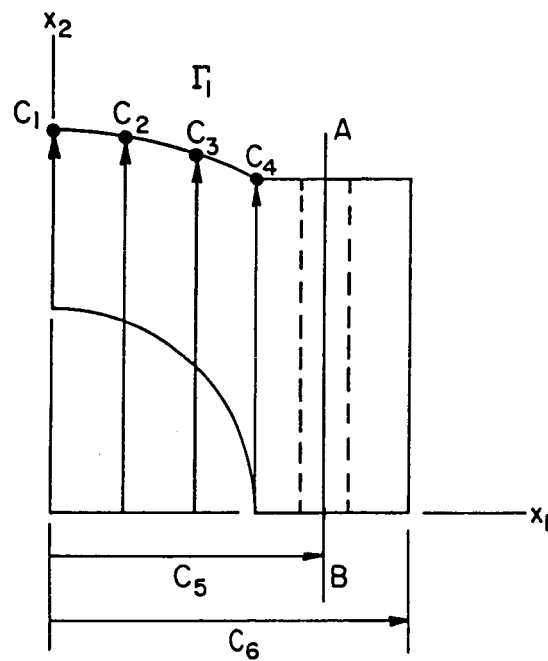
Shape Design Parameters of Engine Bearing Cap
